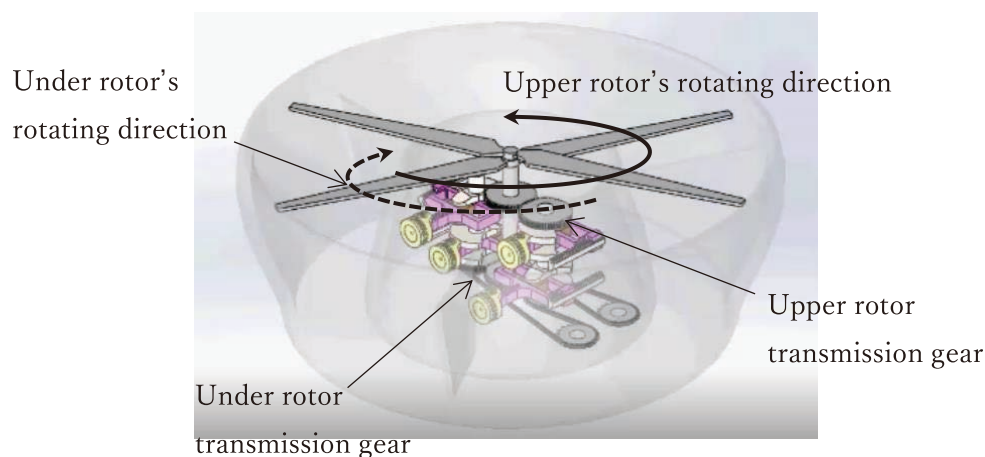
Product image of drone engine with CRP using XY separate crank mechanism.
